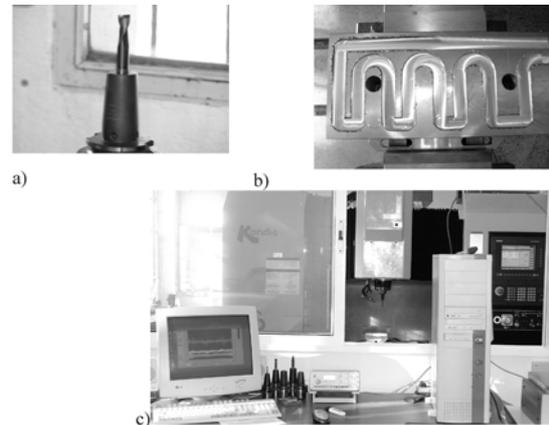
Cutting tool for experiments, b) experimental workpiece, c) partial view of the Laboratory for machine tool research
